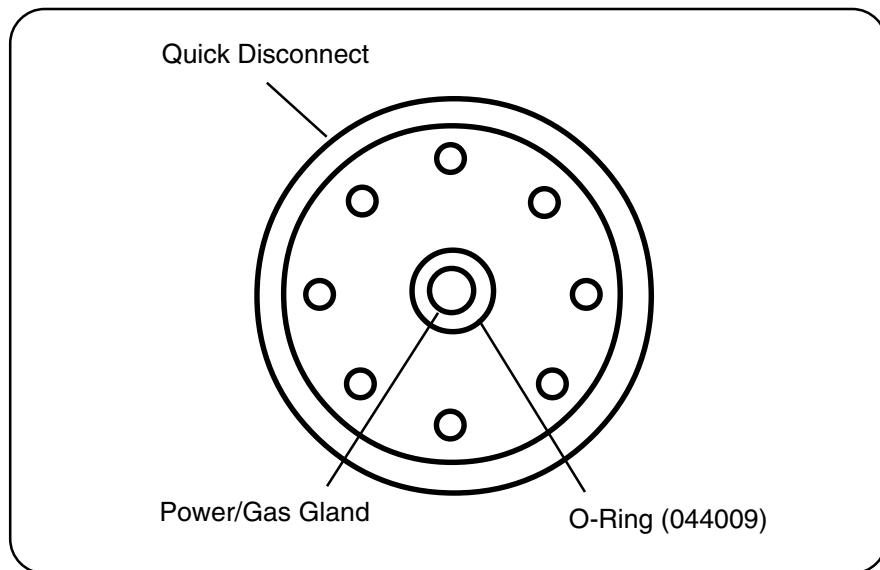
Quick Disconnect O-Ring Removal and Replacement
